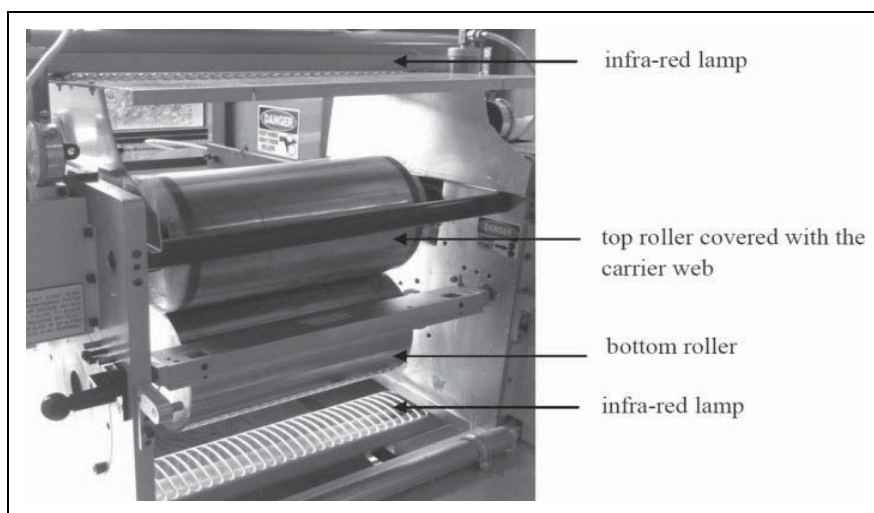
Aluminum embossing roller with a piece of the carrier web ready to be fixed.
